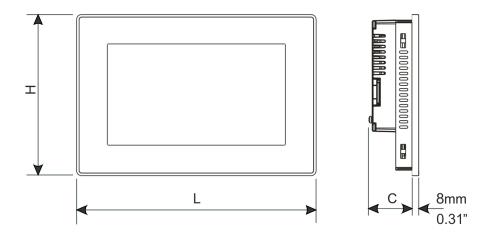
Dimensions – TX710(HB), TX715, TX721
